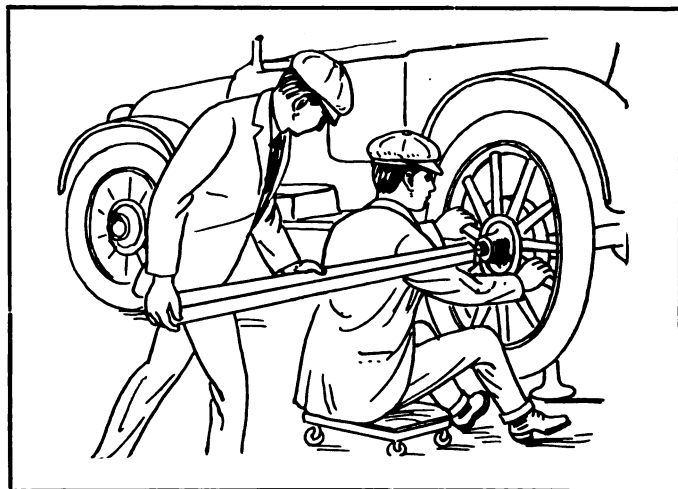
Method of Removing Wheels from Axles Without a Puller.
